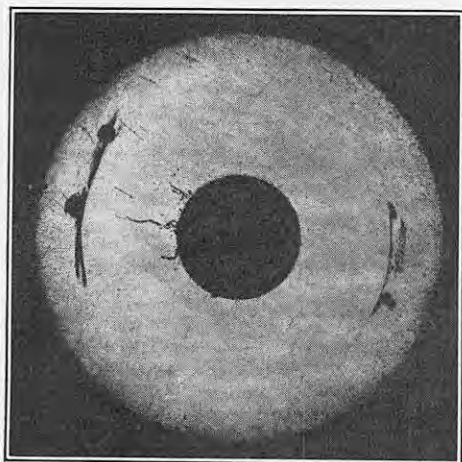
ABRADED SURFACE AFTER FRETTING CORROSION. STEEL ON STEEL.
